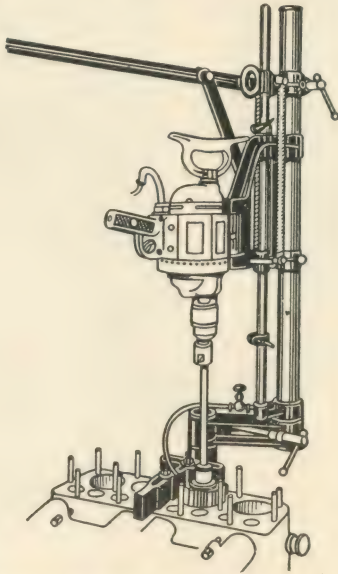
ELECTRIC HONING MACHINE, WITH HAND STROKING ATTACHMENT
